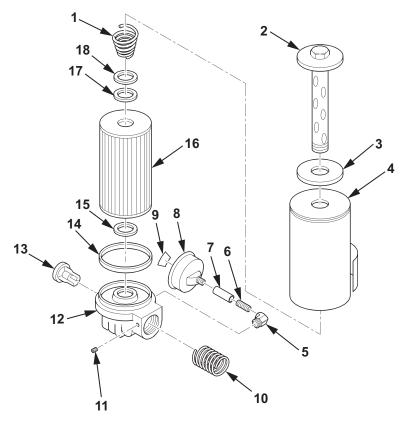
Filter Service Indication Gauge, Relief Valve, and Filter Element Removal.
